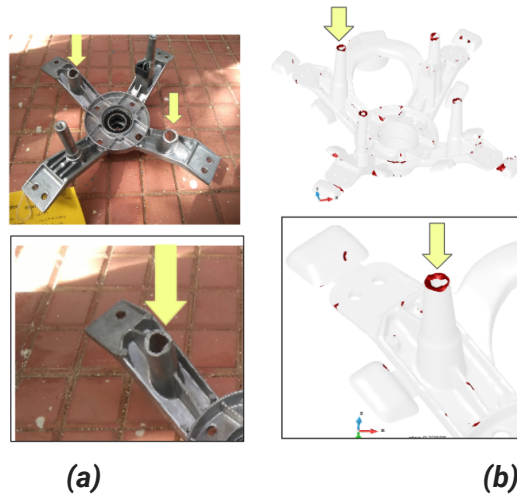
Casting showing air entrapment in experimental casting (a) and in a computer simulation of the same casting (b).
